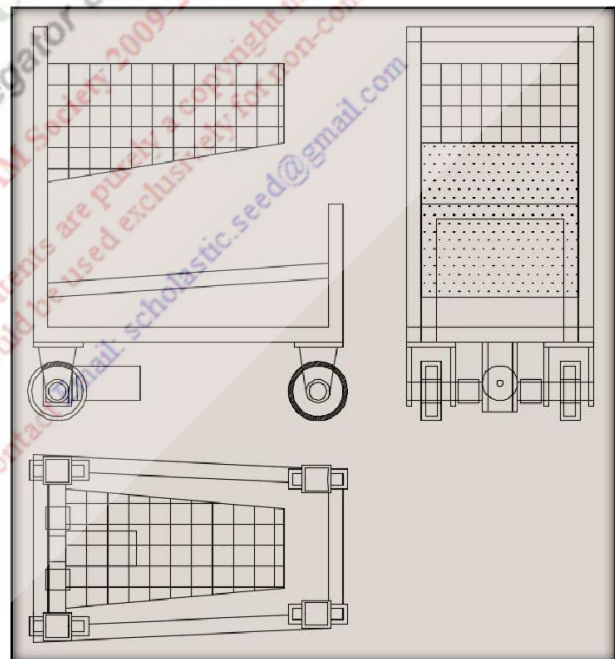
Sketch of Multi-purpose Trolley Actual Sub-Assembly
